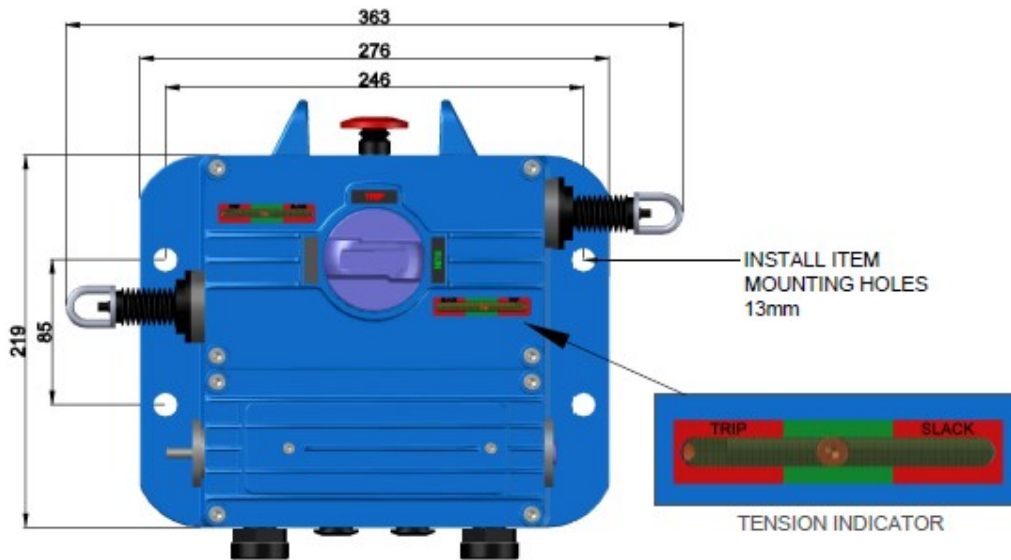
Mechanical Dimensions – Supply 2 Glands Only
